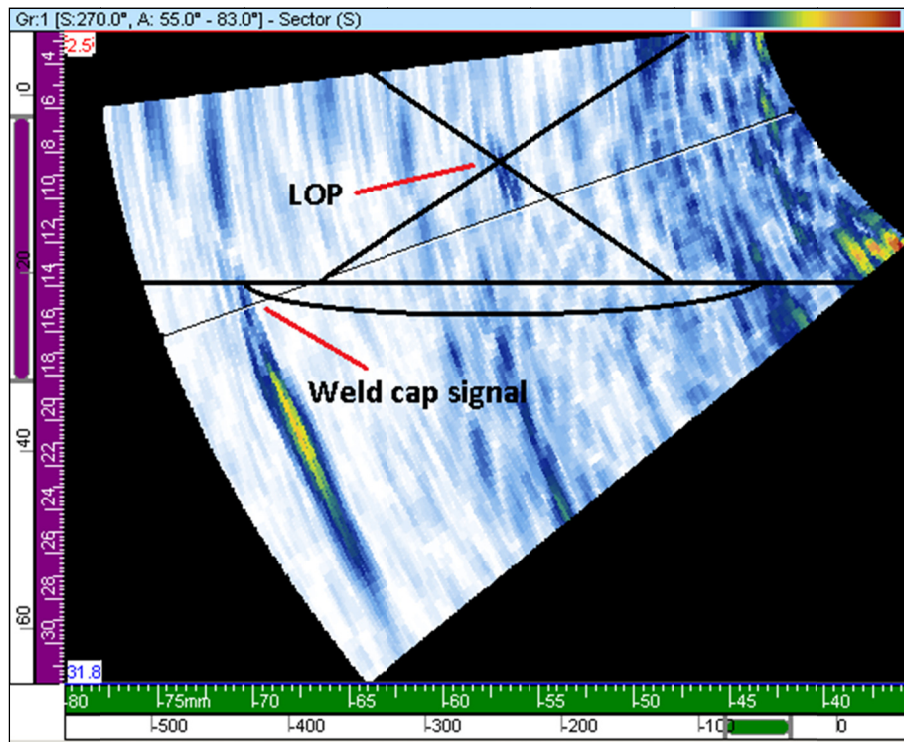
Sector scan acquired on one position on the plate. The weld cap signal is a geometrical feature and the lock of penetration (LOP) is a flaw generated by the welding. Any lack of fusion (LOF) defects should be present on the faces of the weld.
